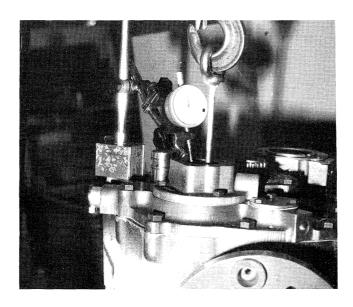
Applying pulling force while checking reverse clutch shaft end play.
